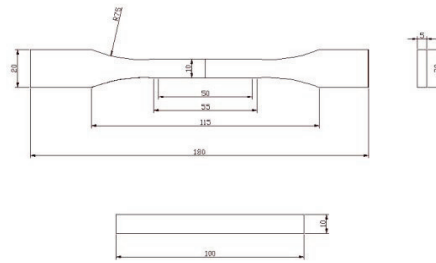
The geometries and dimensions of the specimens for (a) tensile and (b) flexural. Friction and wear tests
